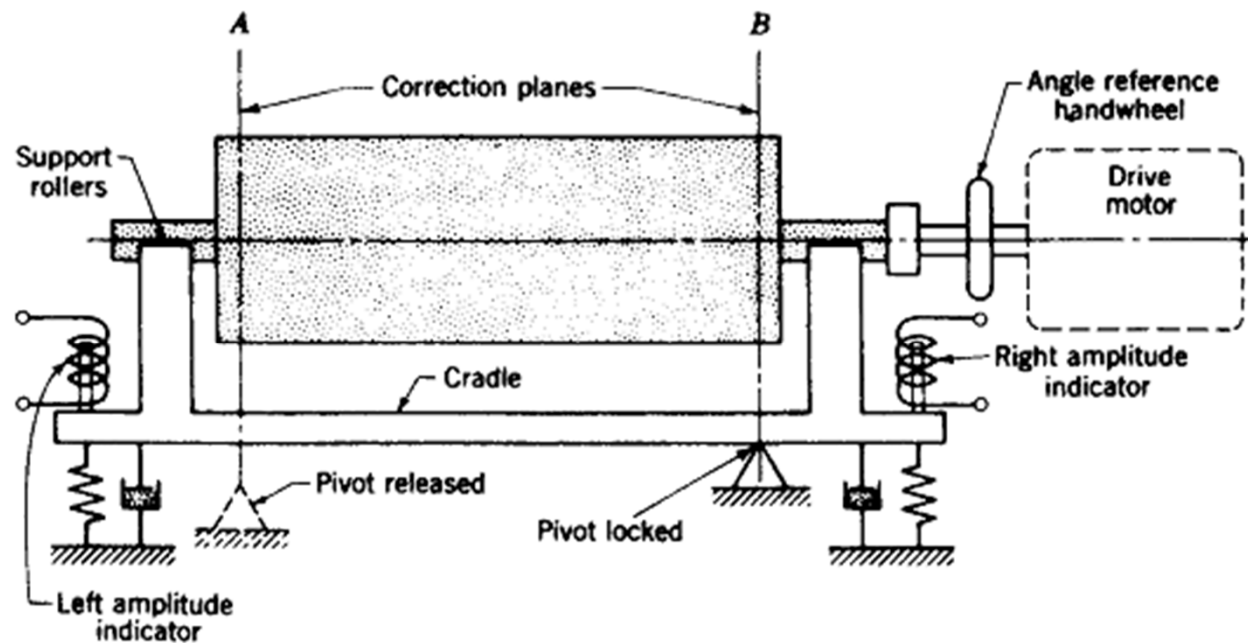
Schematic drawing of pivoted-cradle balancing machine.
